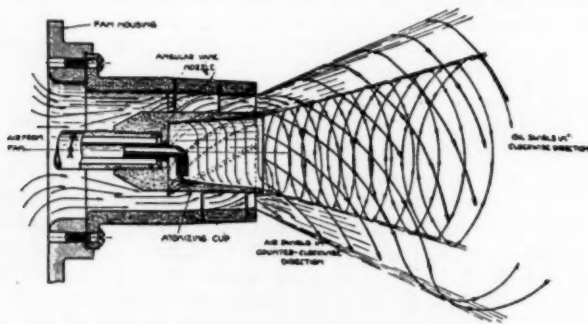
ROTATING ATOMIZING OIL-BURNER NOZZLE
